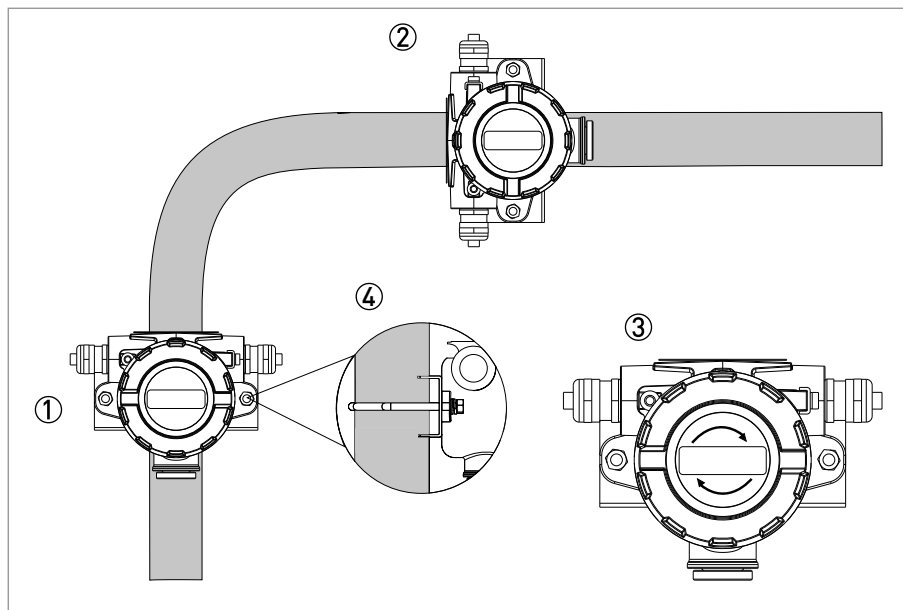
Pipe mounted installation example with 1.5"...2" pipe clamp
